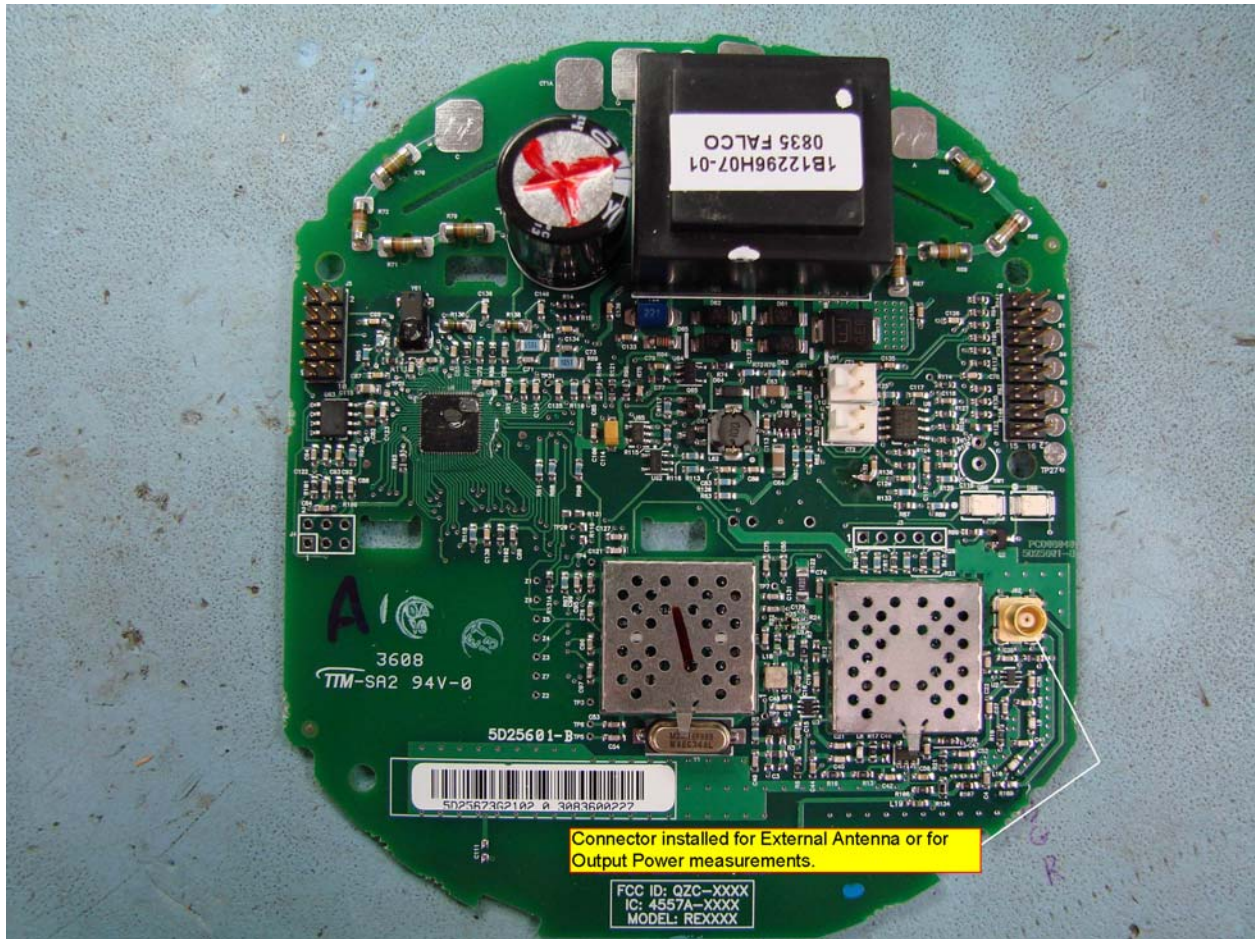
Internal View - Component Side of RX2EA4 (RX2EA4-I) Module
